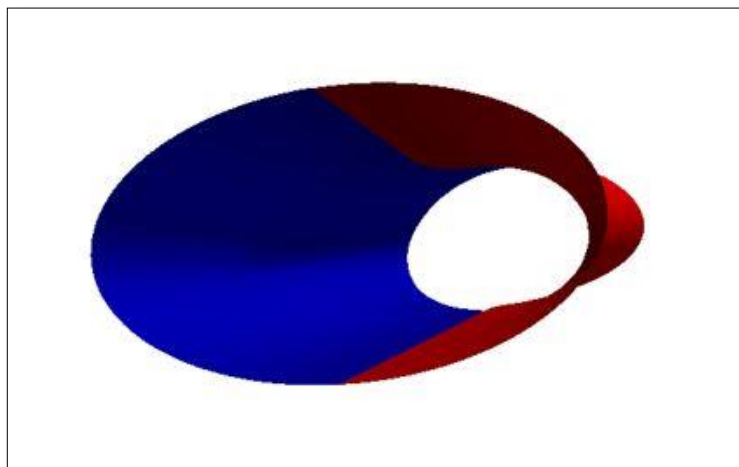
A view from the combustor end showing the two scaled halves joined at the throat.
